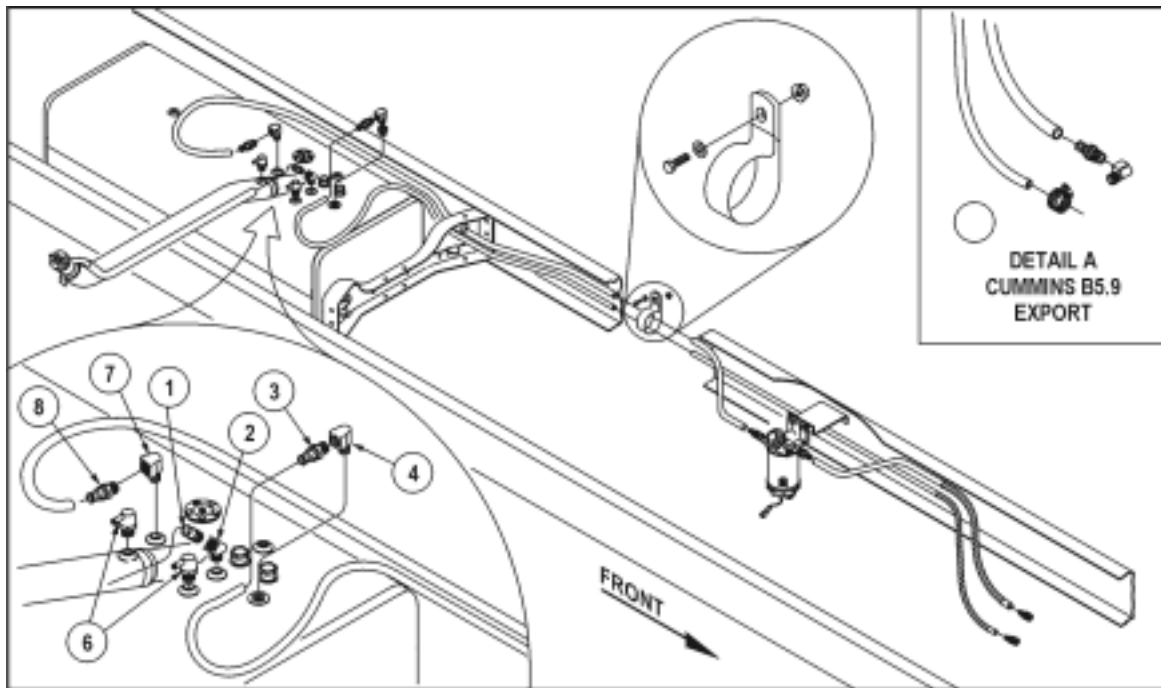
Mid-Mount Tank and Bracket Assemblies
